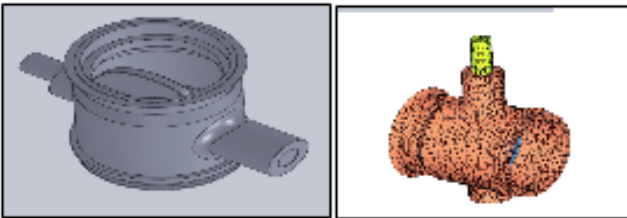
Geometry and FE Model Butterfly Valve assembly
